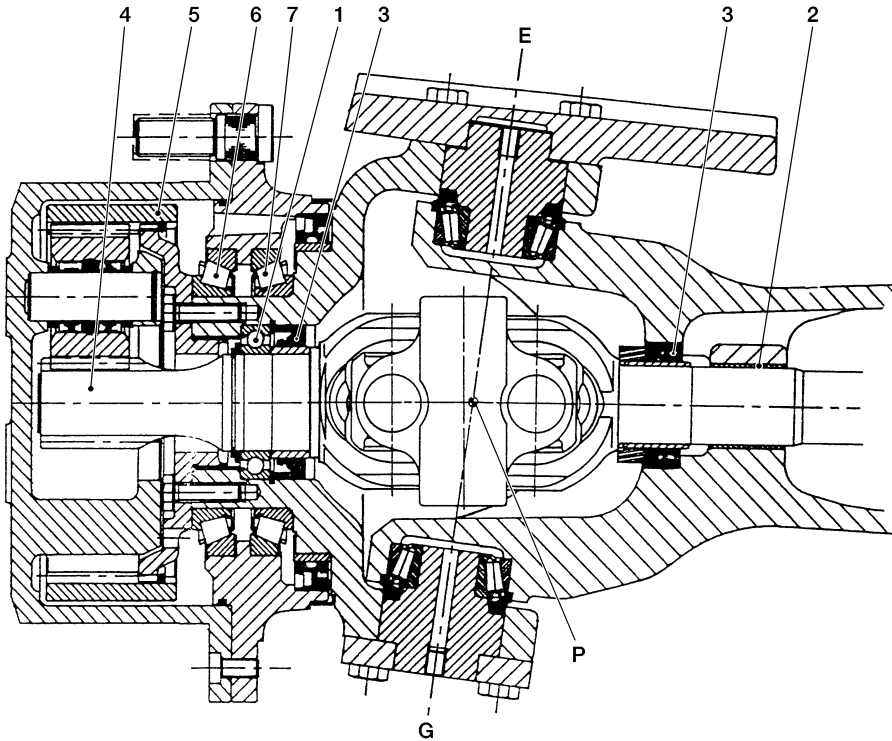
Driven, rigid steering axle with dual joint made by the company GKN – Birfield AG for four-wheel drive special-purpose vehicles, tractors and construction machinery.
